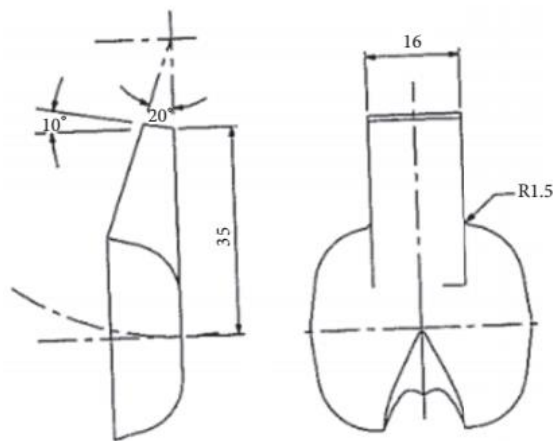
A basic bucket stem design for bolted fixing. All dimensions are in % of PCD [21]
